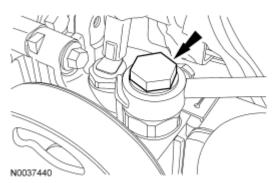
Locating Power Steering Pressure (PSP) Tube Bolt Courtesy of FORD MOTOR CO.
